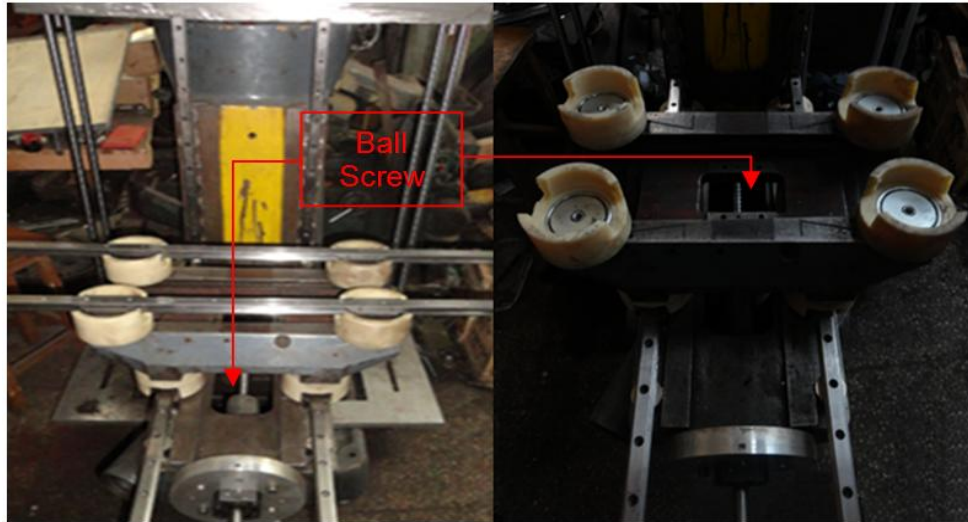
Magnetic pots, carriages and rails to fulfill saddle-table assembly
